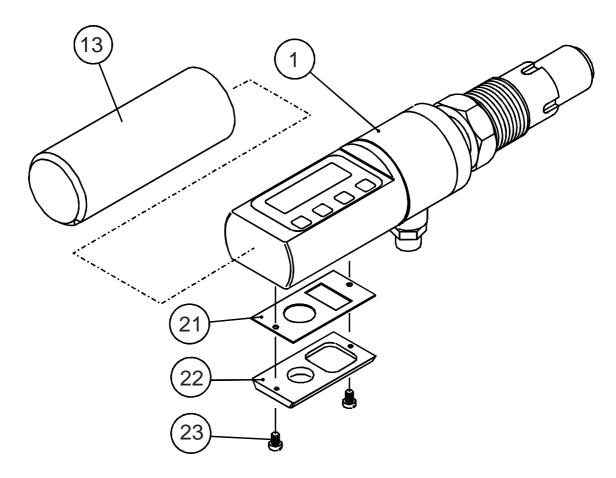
Parts list: VDU with G1 thread with metal/metal taper procss connection, sensor 1 (master)
